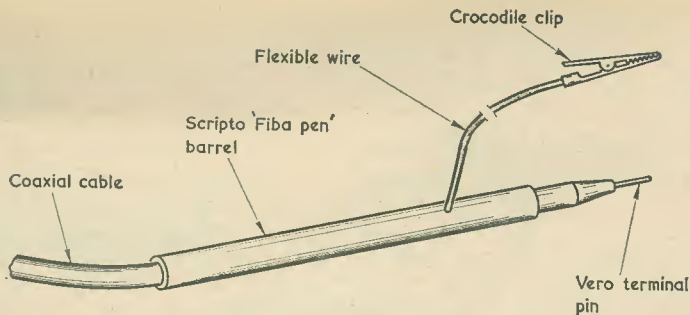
Making up a screened oscilloscope or millivoltmeter probe in the case of a discarded fibre pen
